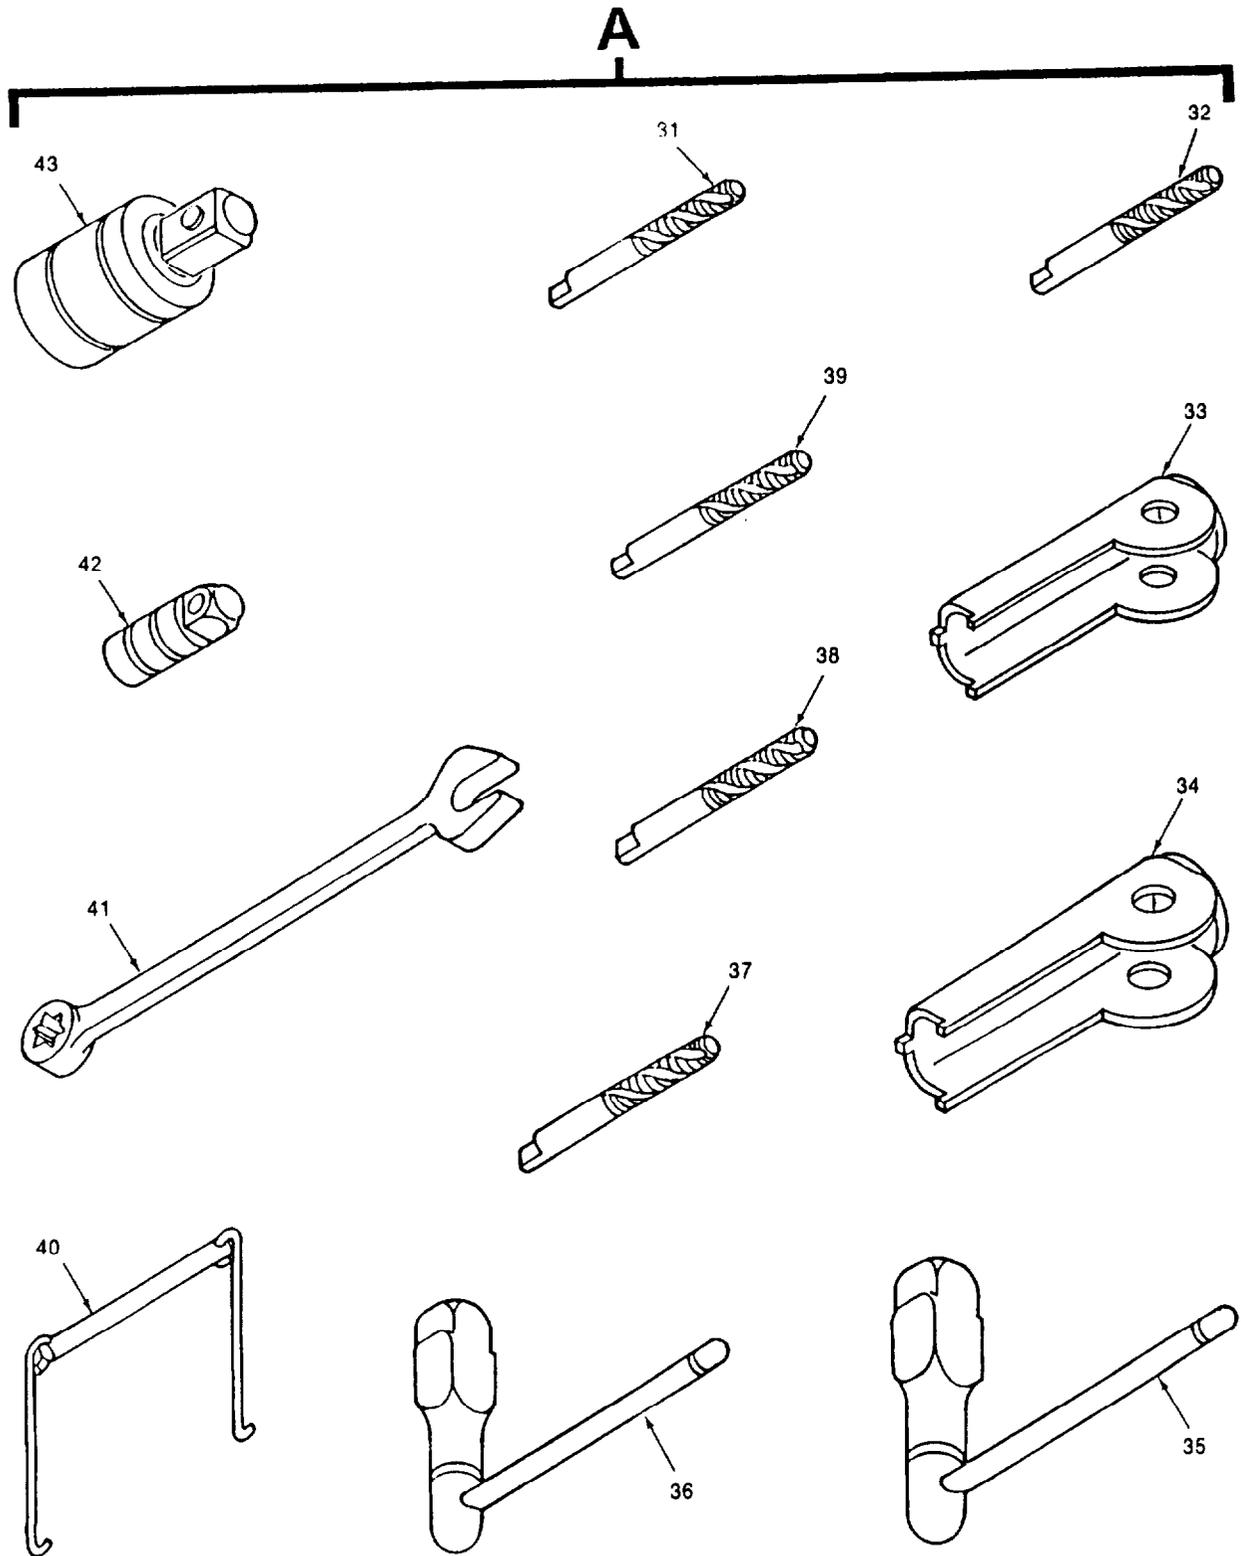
Electronic System Tool Kit (Sheet 1 of 3)
